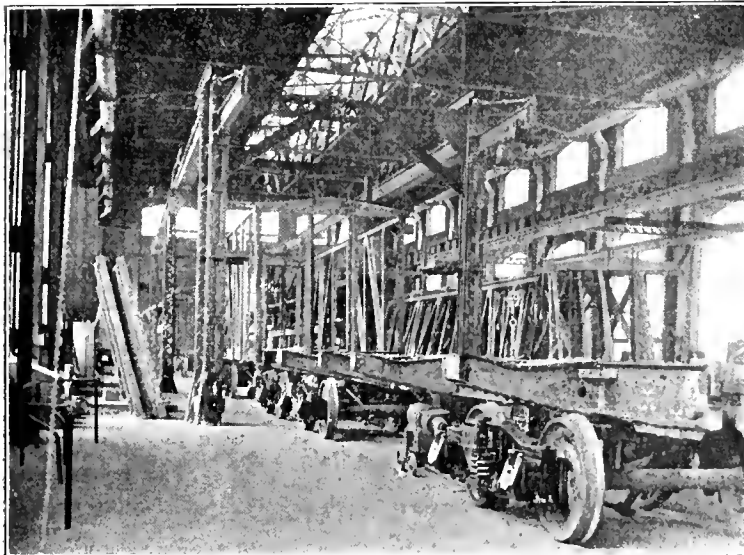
Erecting Side and End Frames on Steel Freight Cars.
